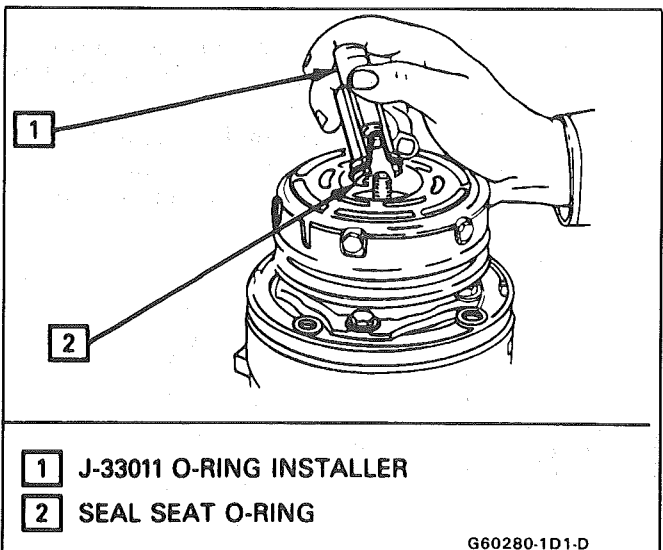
Installing Seal Seat O-Ring (Off Car)
